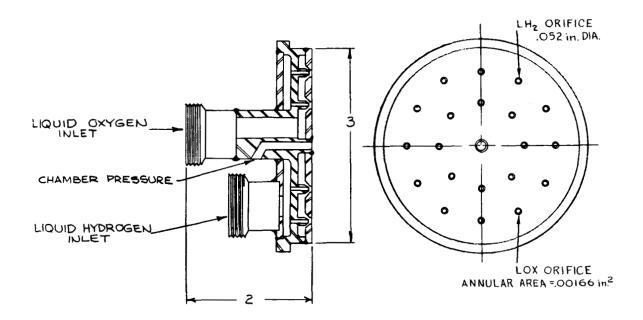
MULTI-COAXIAL INJECTOR ASSEMBLY
